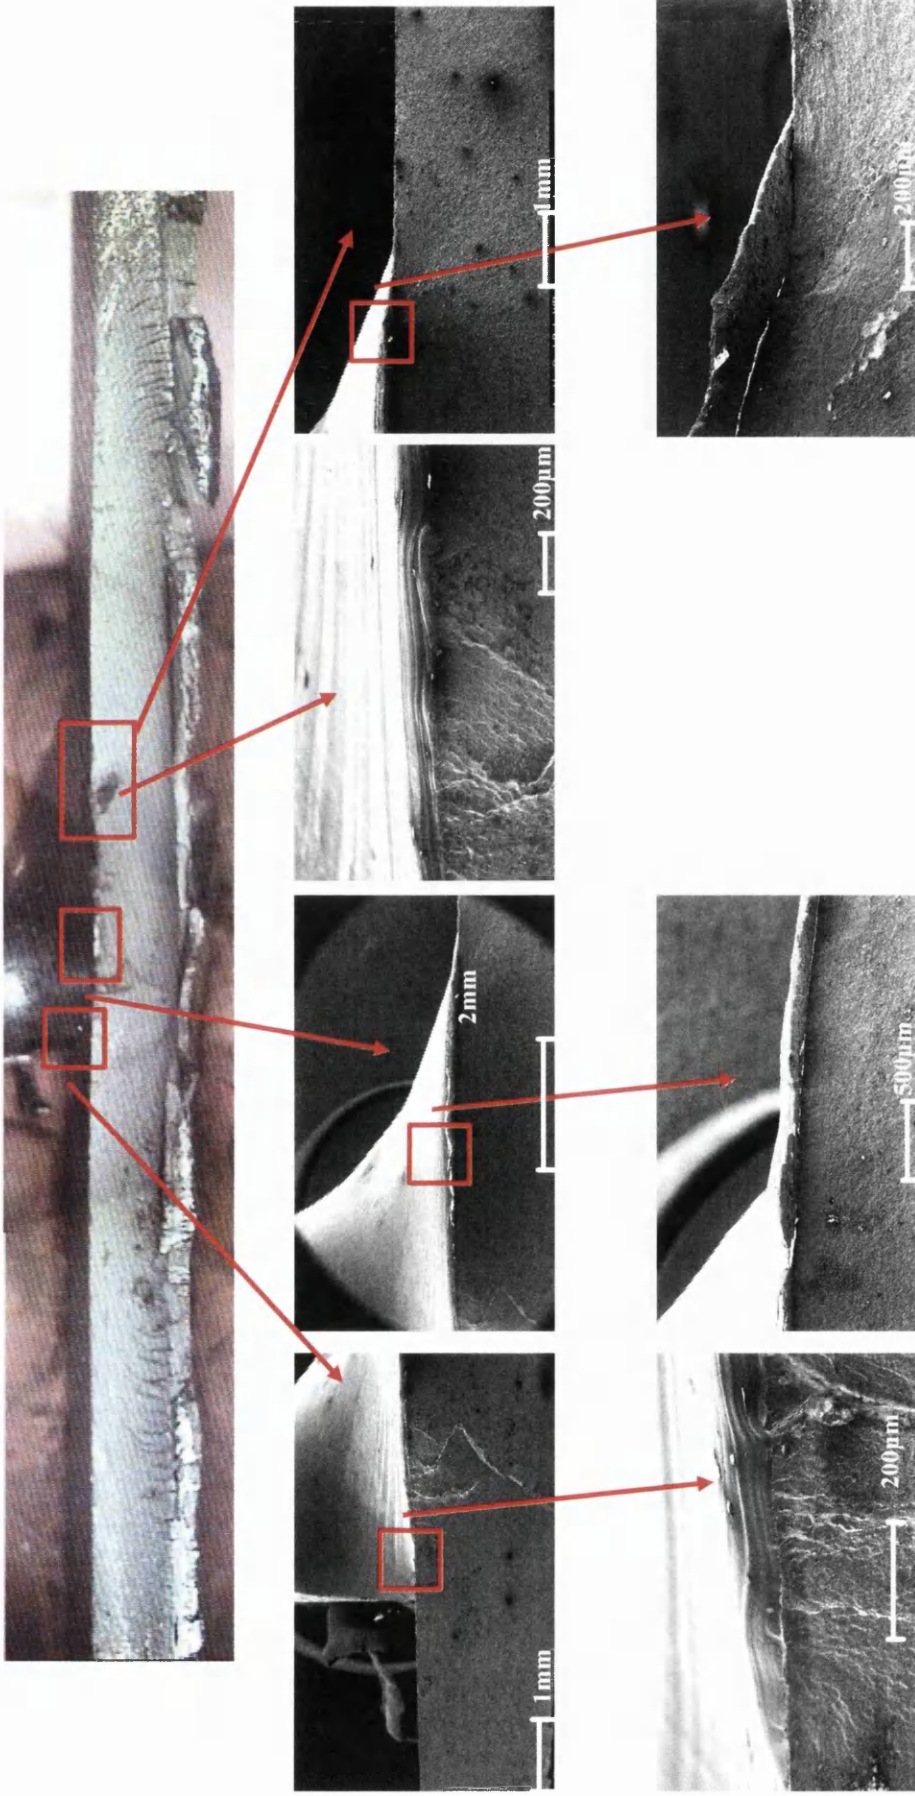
Typical Fracture Surface for GM8 Weld Throat Failure – Weld View
